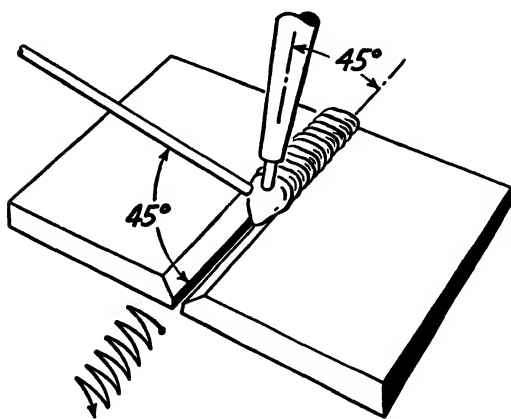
To butt-weld pieces over $\frac{1}{8}$ in. in thickness, bevel the edges to ensure good fusion.
